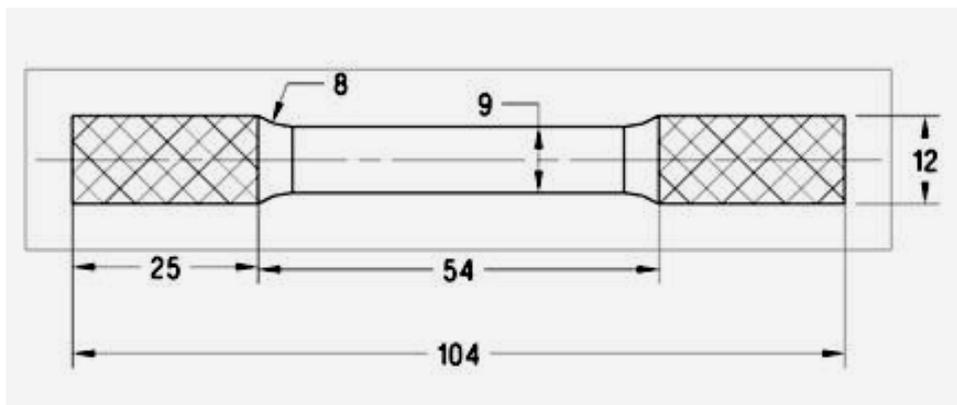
Tensile specimen according to ASTM E8 with all dimensions in mm
